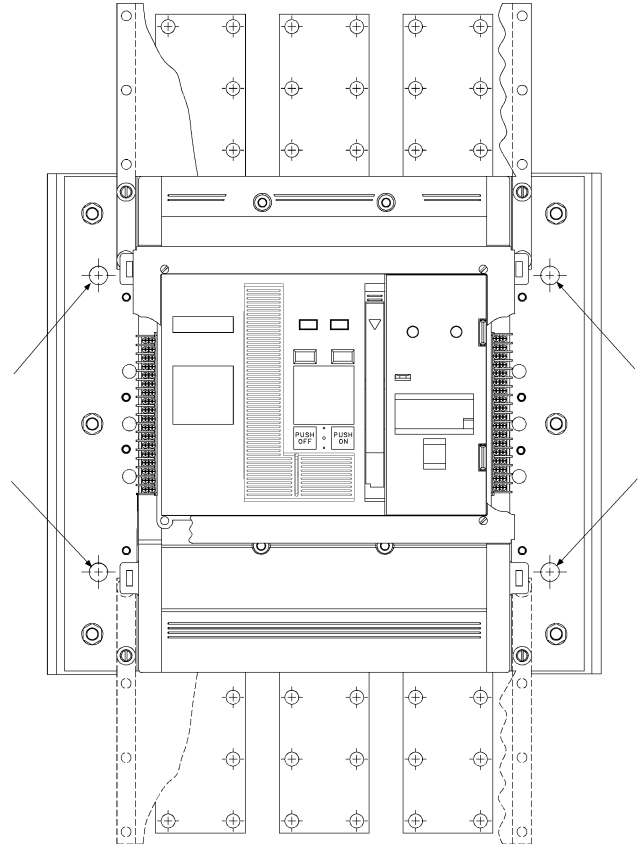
Locations of the 3/4-inch diameter through holes for mounting the breaker in equipment, 4000 A front-connected frame.
